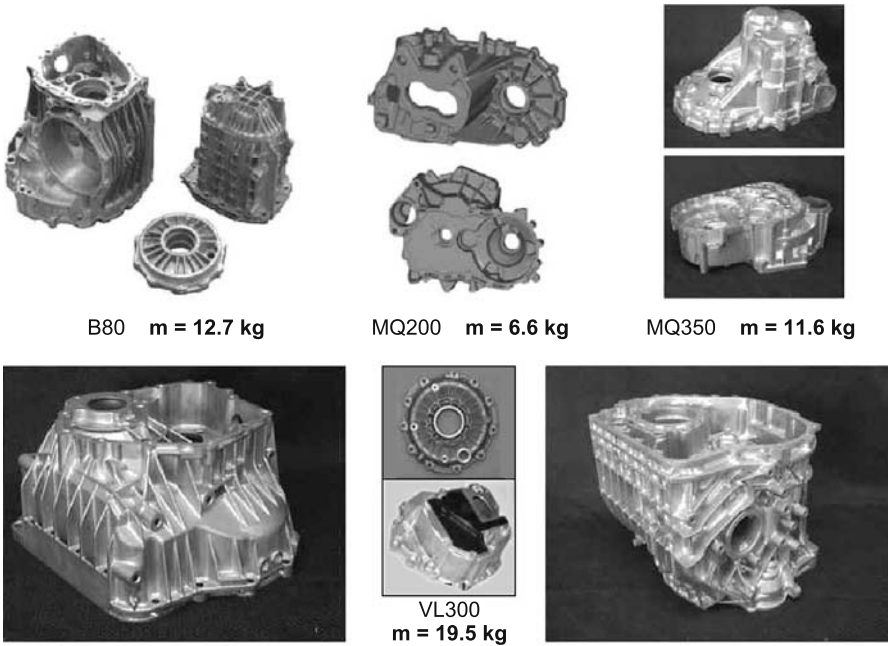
Magnesium gearbox housing (VW, Audi) [7]
